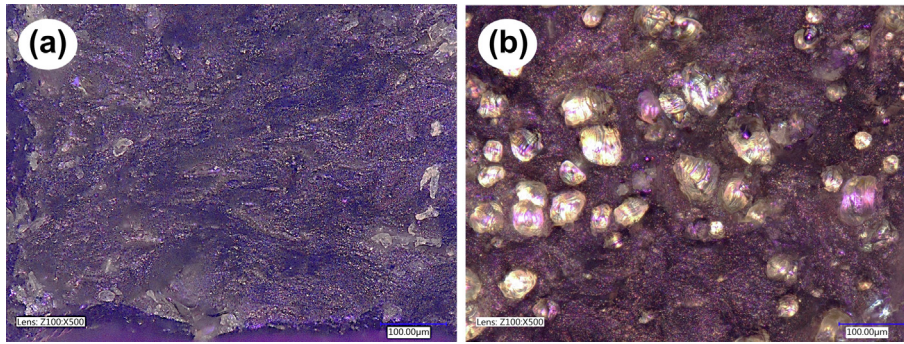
Fracture surface at low magnification of T1 ring (a) and T3 ring (b).
